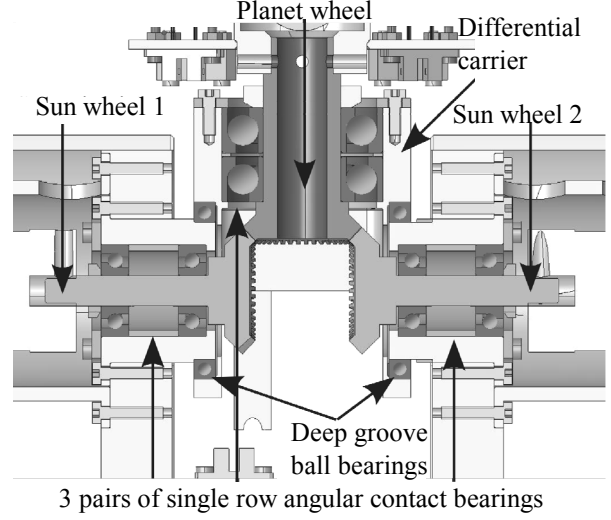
Differential drive concept with 3 pairs of single row angular contact bearings and a pair of deep groove ball bearings.
